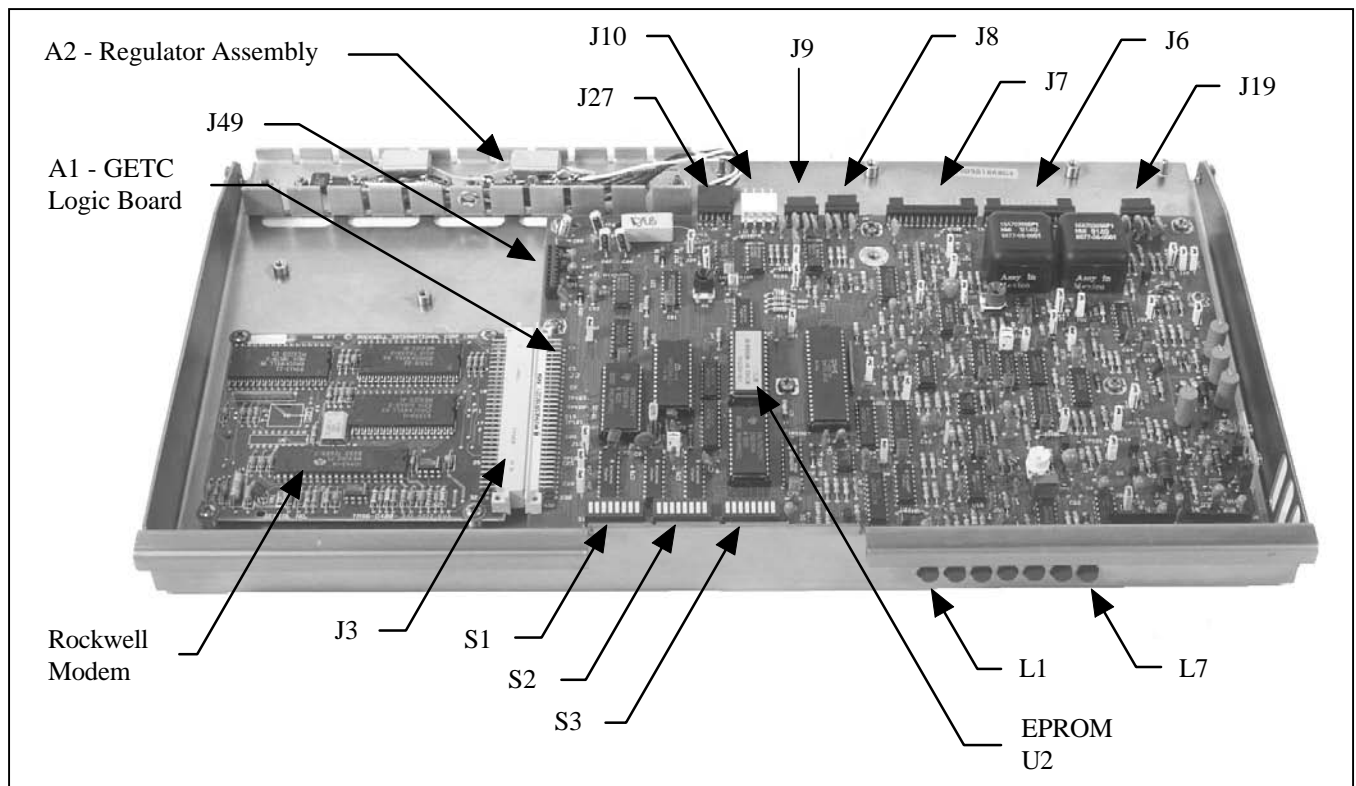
Basic GETC Shelf Assembly (Turbo Board not shown)
